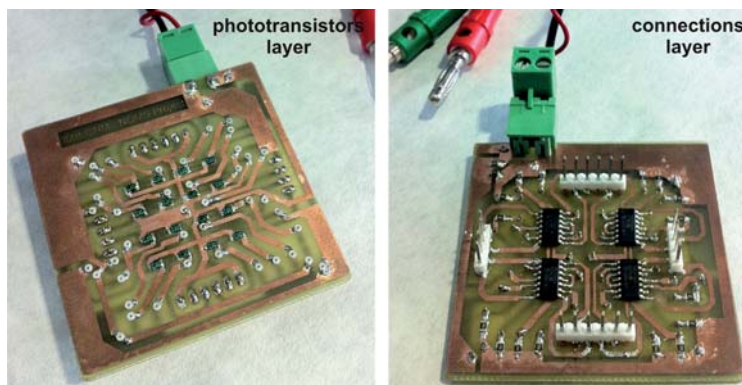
Top and bottom layers of the double-side PCB with all the components assembled for a 4 x 4 actuators prototype.
